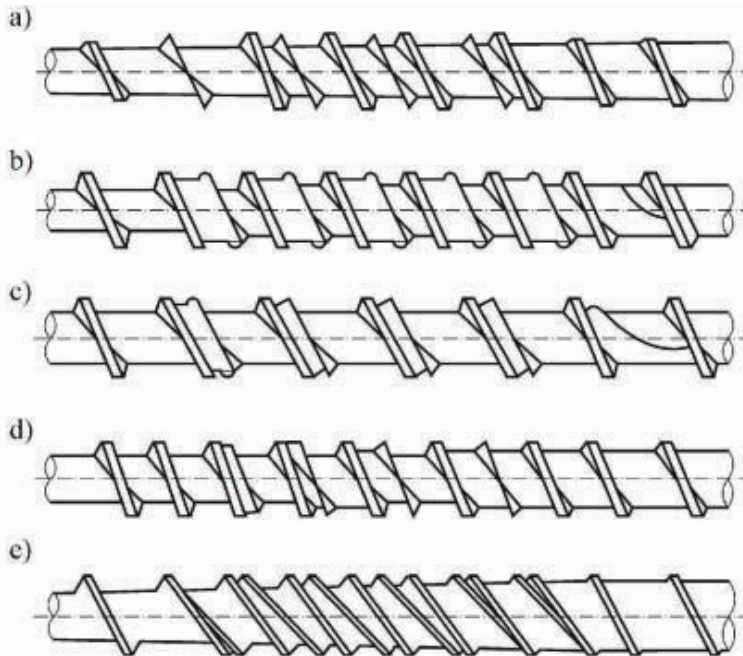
Examples of a modified form of intensive shearing elements with an additional barrier flight; a) the Maillefer screw, b) the Barr screw, c) the Dray screw, d) the Kim screw, e) the DFM screw [49, 79, 91]
